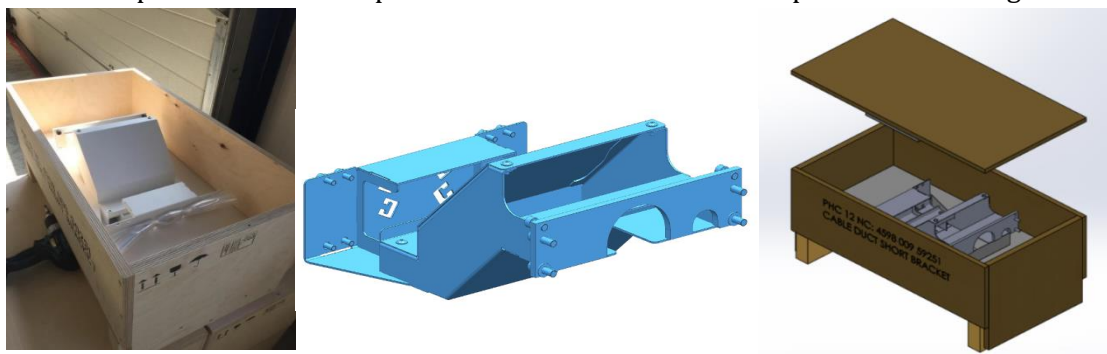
CDS: Picture (Left), Exploded View (Middle), On Dedicated Pallet (Right)
